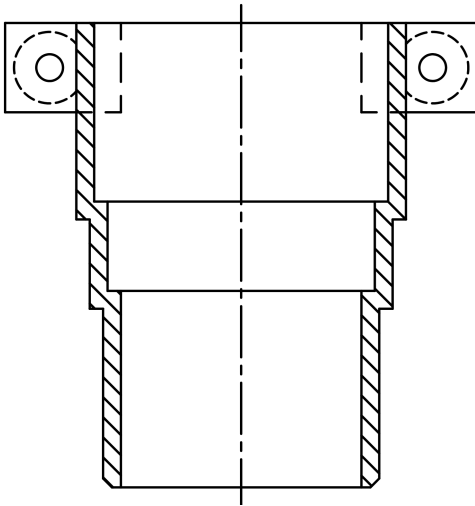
Typical pipe coupler with fixing lugs and outlet spigot sleeve
